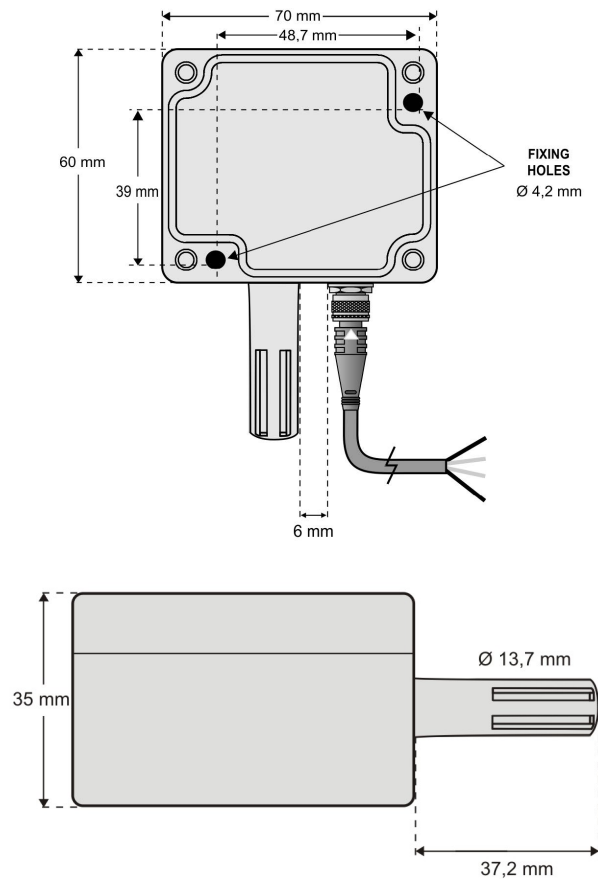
Dimensions of the RHT-WM-485-LCD model
